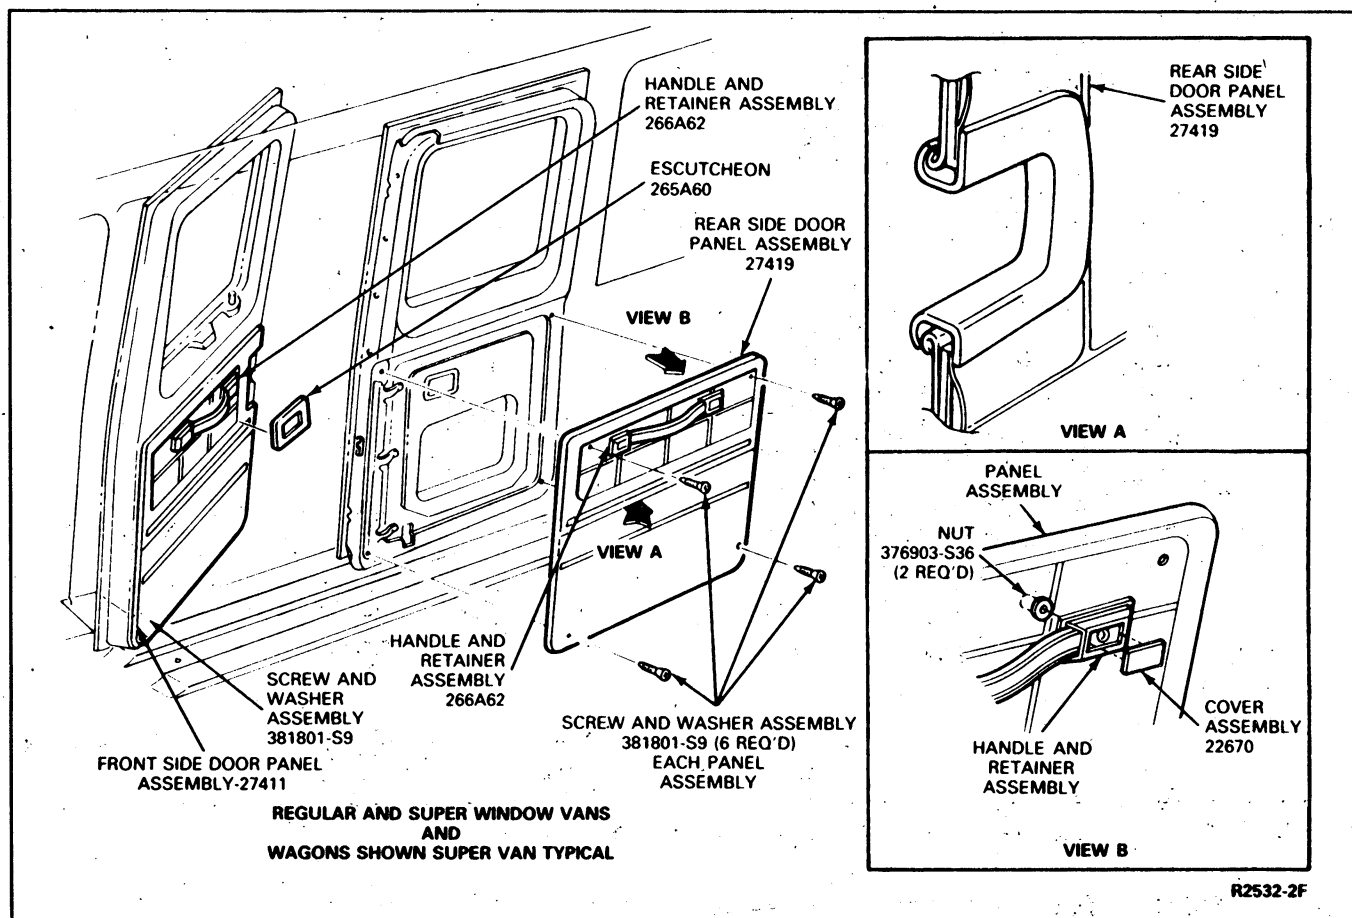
Side Hinged Door Trim Panel—E-150—E-350
